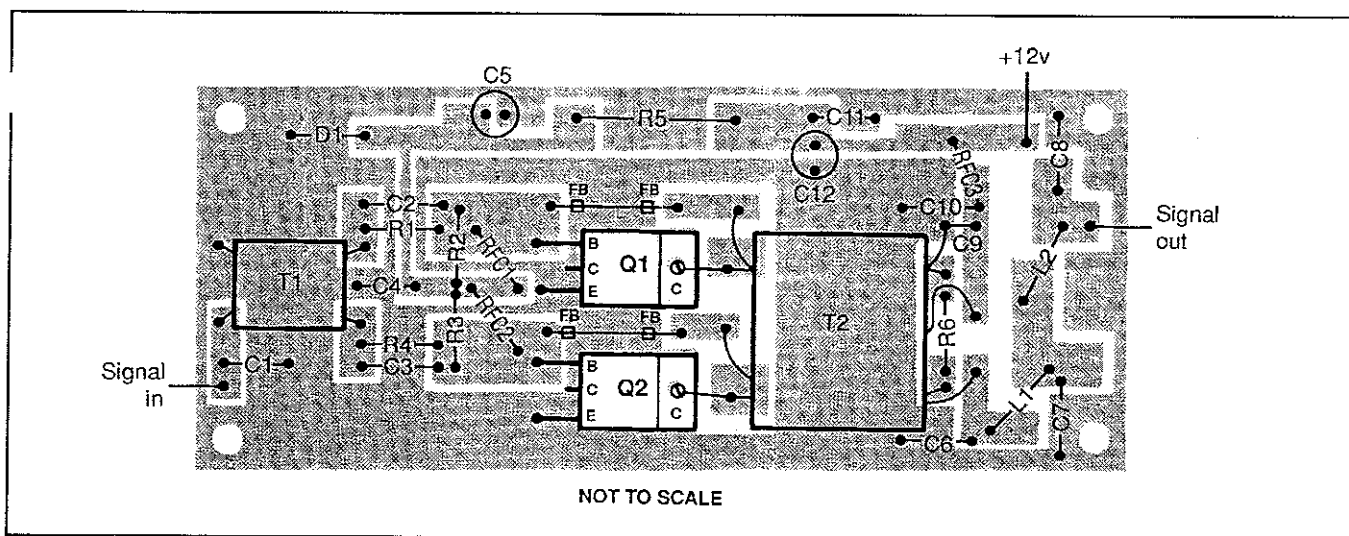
Expanded view (not to scale) of the parts placement on the etched-foil side of the amplifier PC board.
